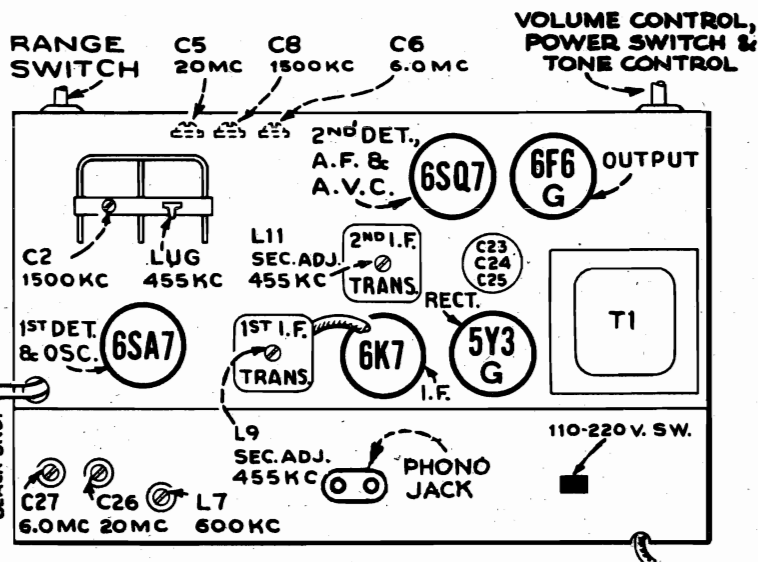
TUBE, TRIMMER AND PARTS LOCATION
